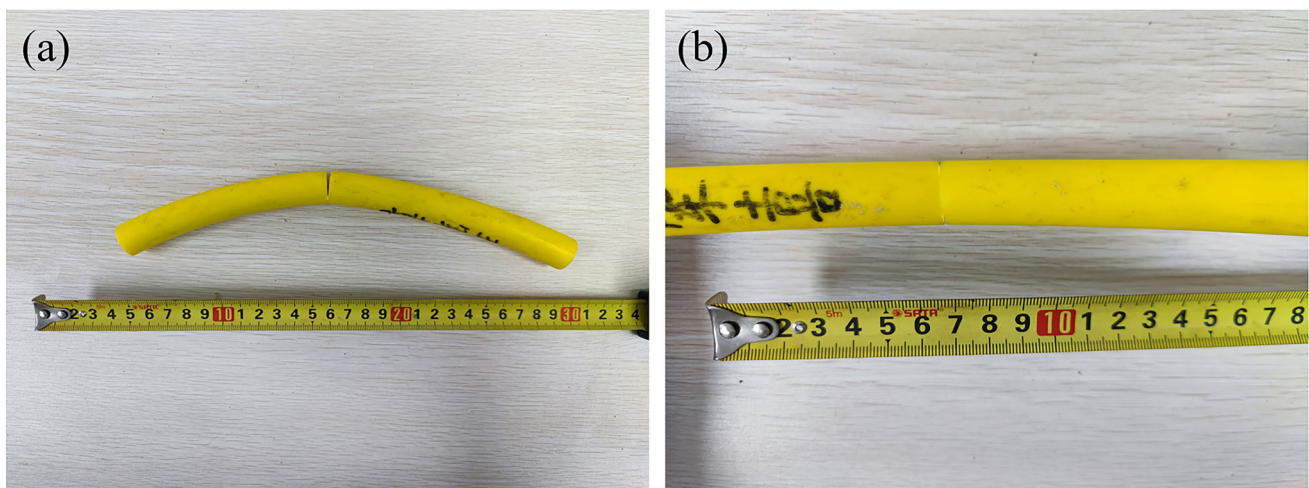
(a) Side, and (b) opposite side of fracture appearance of failed pipe
